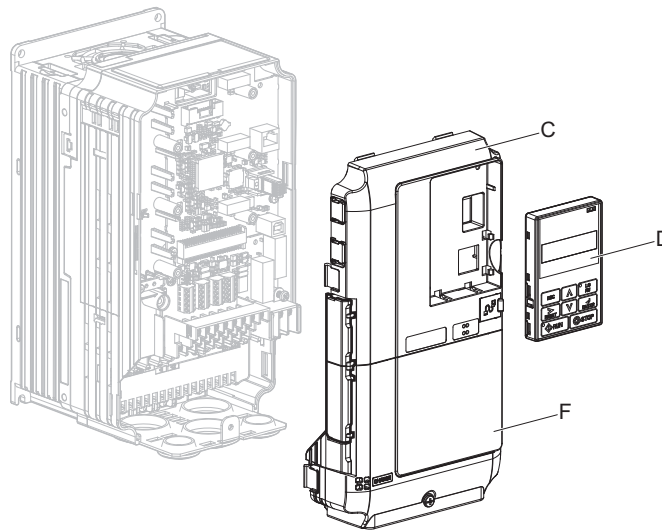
Remove the Keypad, Front Cover, and Terminal Cover
